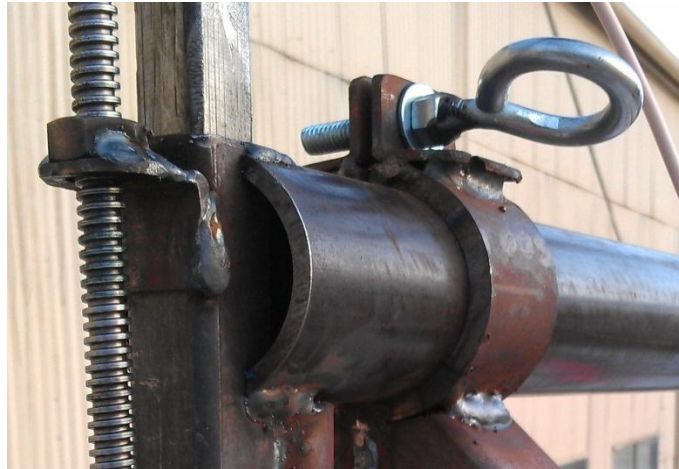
Detail view of roll tube, pitching collar, and winged tube
